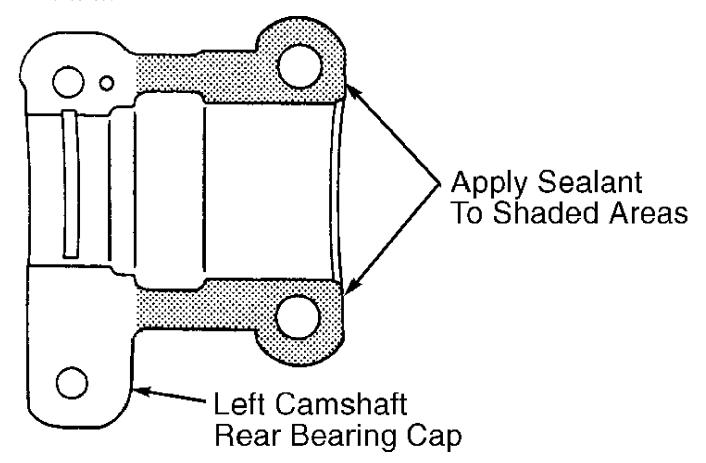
Installing Camshafts Courtesy of Nissan Motor Co., U.S.A.
